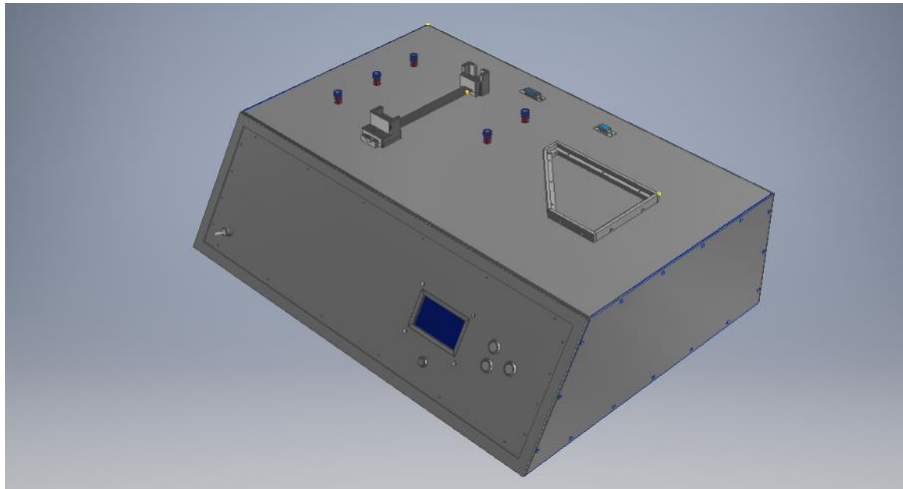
Mechanical Design of Power Drive Module Board Test Jig
